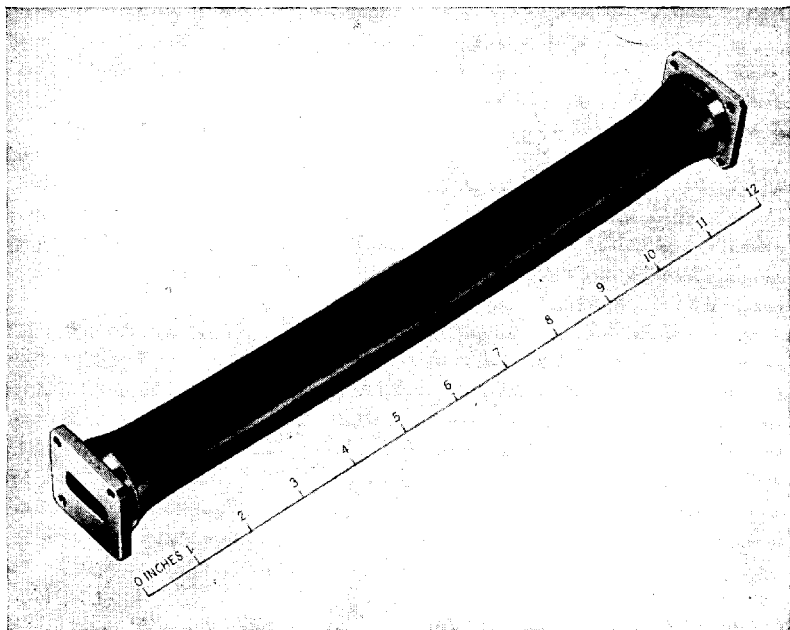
Rubber-covered wound-metal-hose assembly.
